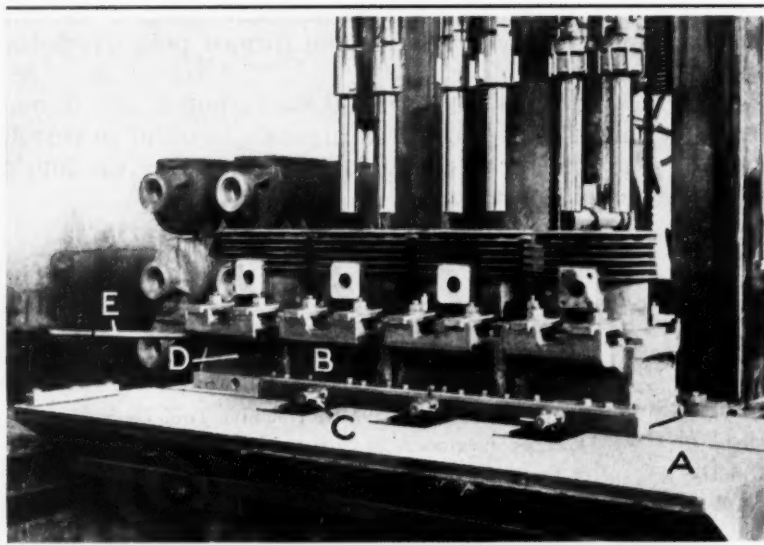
Rough-boring, Semi-finishing and Reaming Cylinder Blocks on Moline Hole Hog Equipped with Special Fixtures
